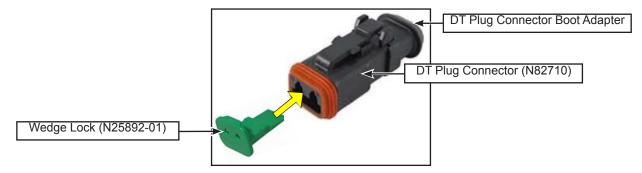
Wedge Lock Insertion into Deutsch DT Plug Connector
